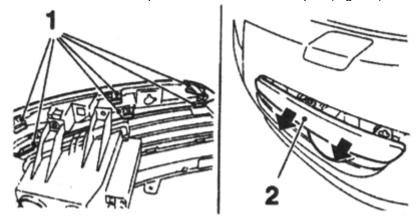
For withdrawal lining efforts should be overcome latches on Feedback Stora not cover rear Bumper:
